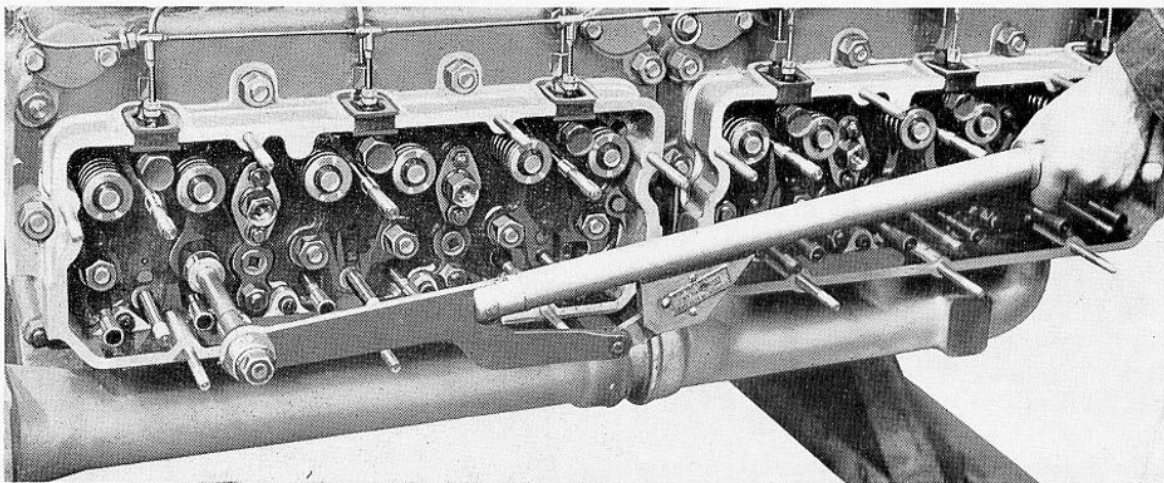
TIGHTENING CYLINDER HEAD NUTS WITH A TORSION SPANNER
